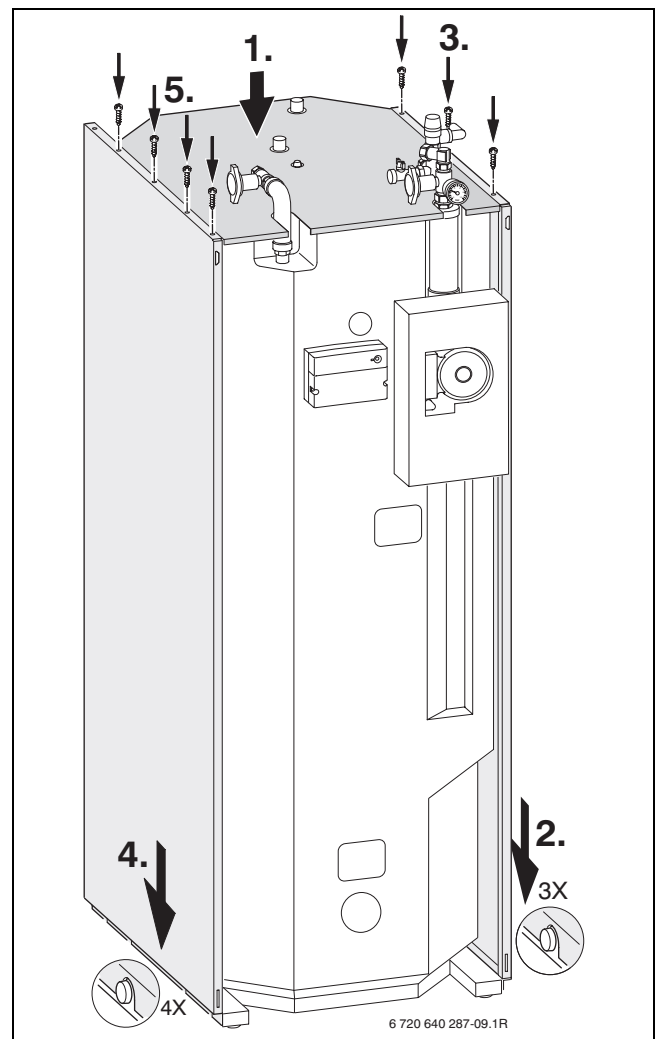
Example: Fitting the side panels for cylinder arranged to the left.
